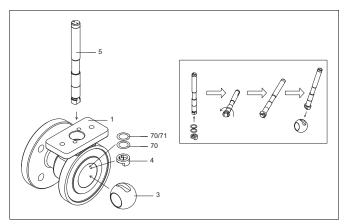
Assembling the shaft in sizes 1" and 1.5"
